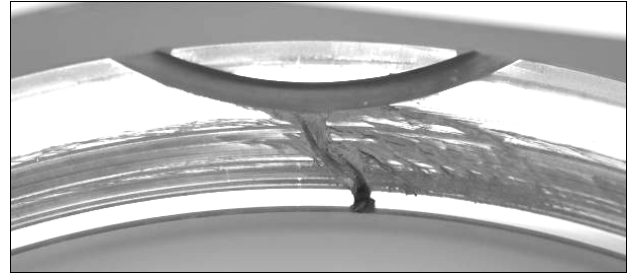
Developed radial flow channel with erosion in a tungsten carbide rotating seal face using Mayer lubrication groove technology
